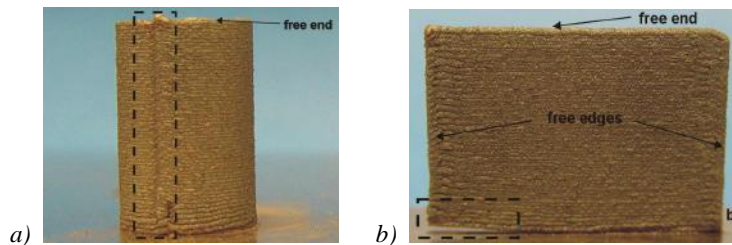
Deposited structures: a) cylinder and b) straight wall
